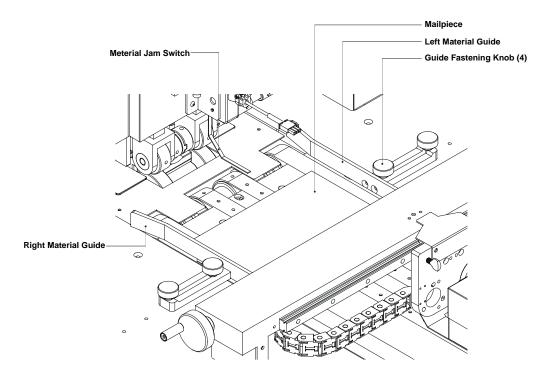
Outfeed section of the feed rollers illustrating the material side guides.
